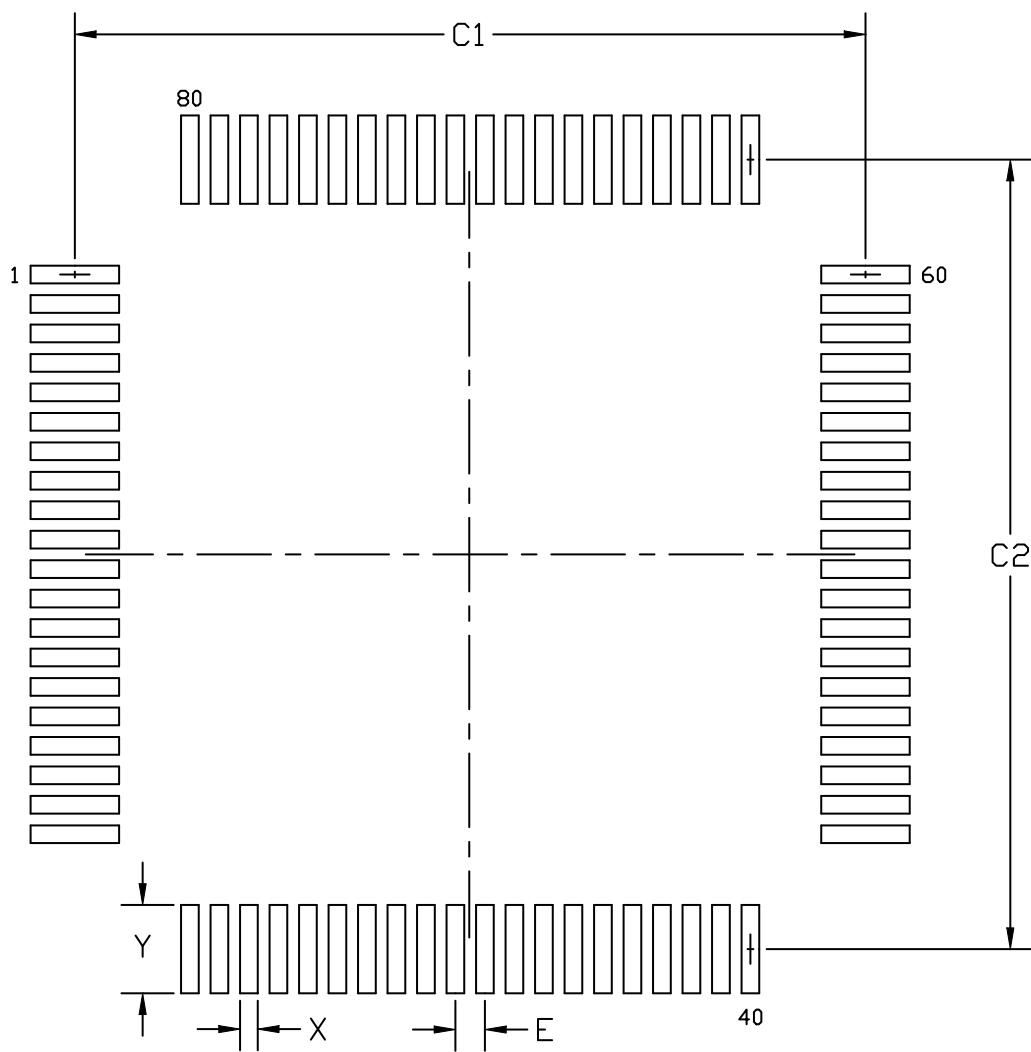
TQFP80 PCB Land Pattern Drawing
